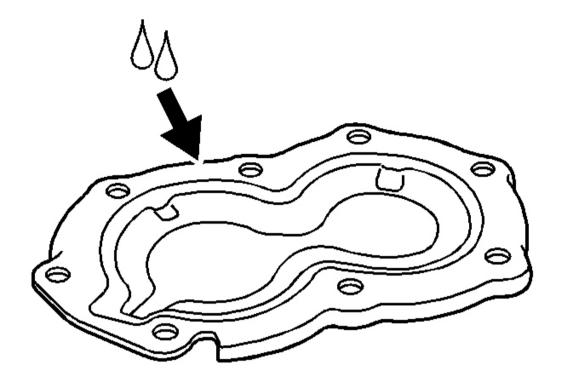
Installing Sealant To Rear Cover Courtesy of GENERAL MOTORS CORP.
